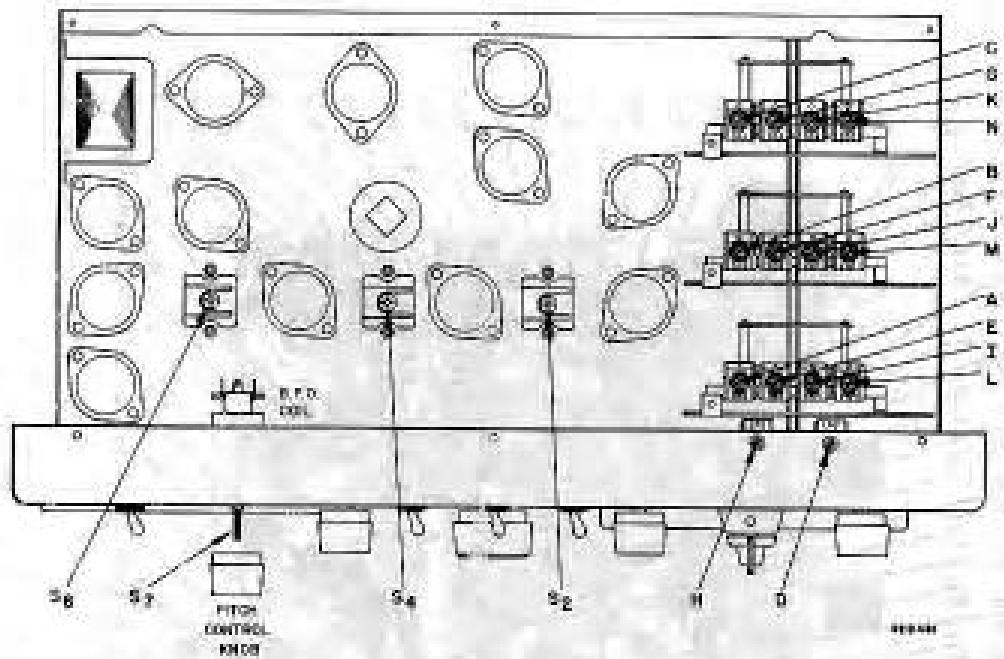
ALIGNMENT ADJUSTMENTS, BOTTOM VIEW.
